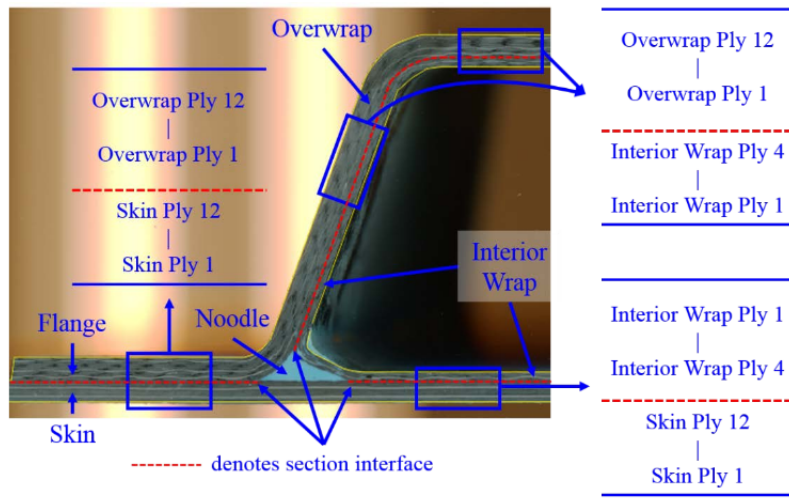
Cross-sectional view of the stringer specifying the layup of the different parts [31].
